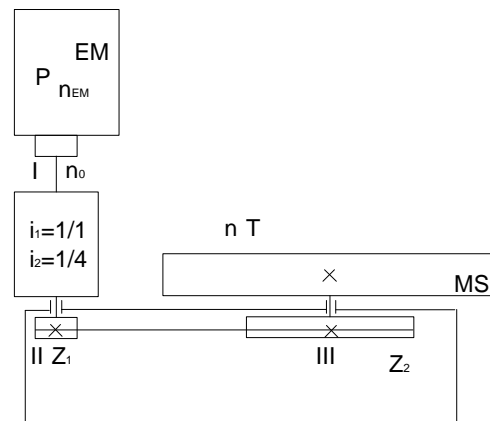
The kinematic scheme of the main chain of a vertical lathe with a two-step gearbox and toothed belt without a pinion-crown mechanism.
